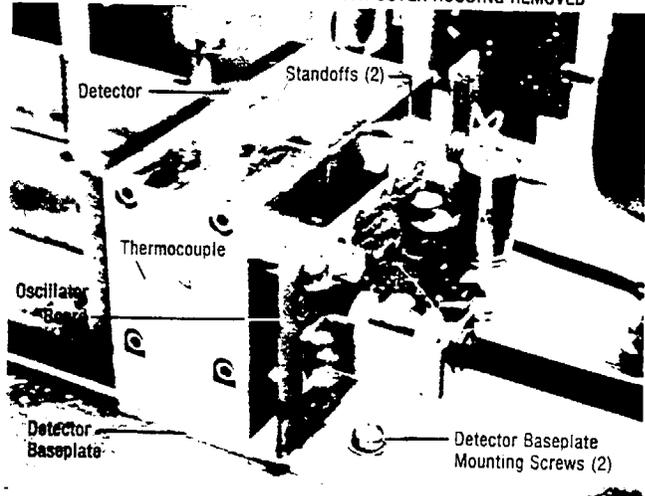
Disassembly of Detector/Oscillator Assembly
